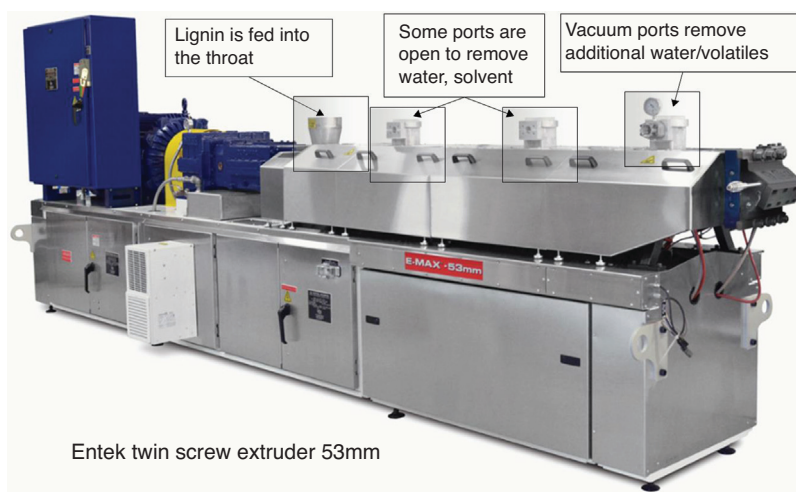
53 mm diameter extrusion machine used for pelletizing lignin [4].
